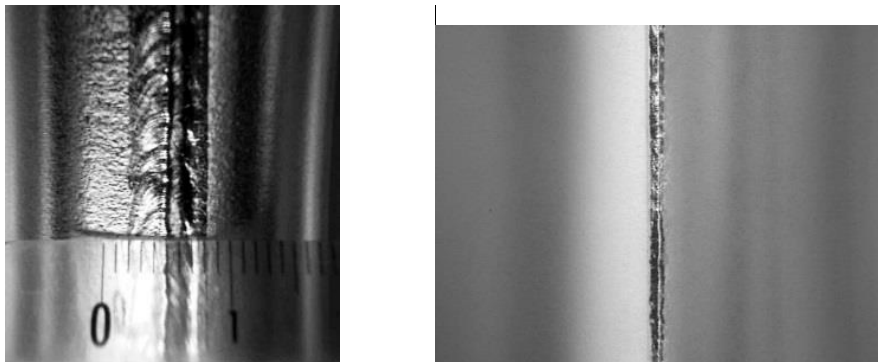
Typical pictures of an iris (left) and equator (right) welding (inner side of the cavity)
